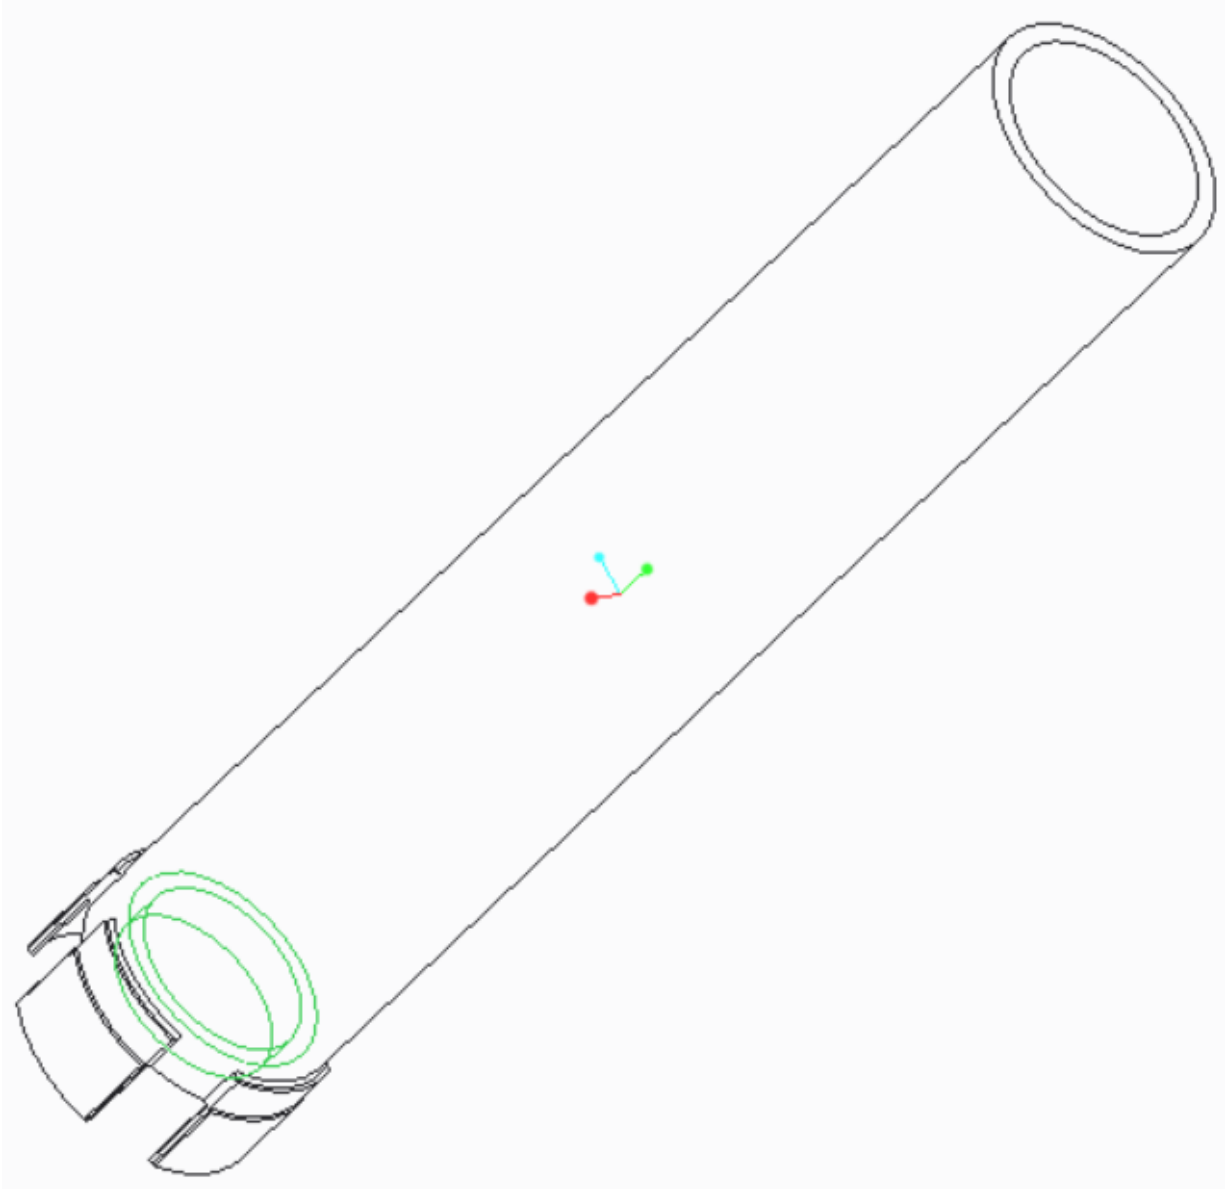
Microscope design showing bottom part hollow cylinder for objective lens thread attachment
